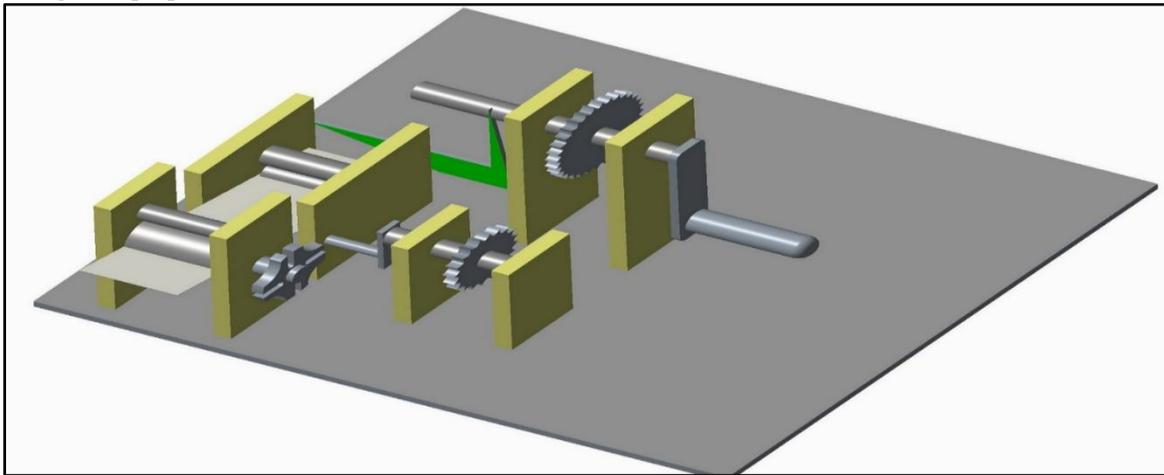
3-D model of automatic paper cutting machine by using geneva mechanism
